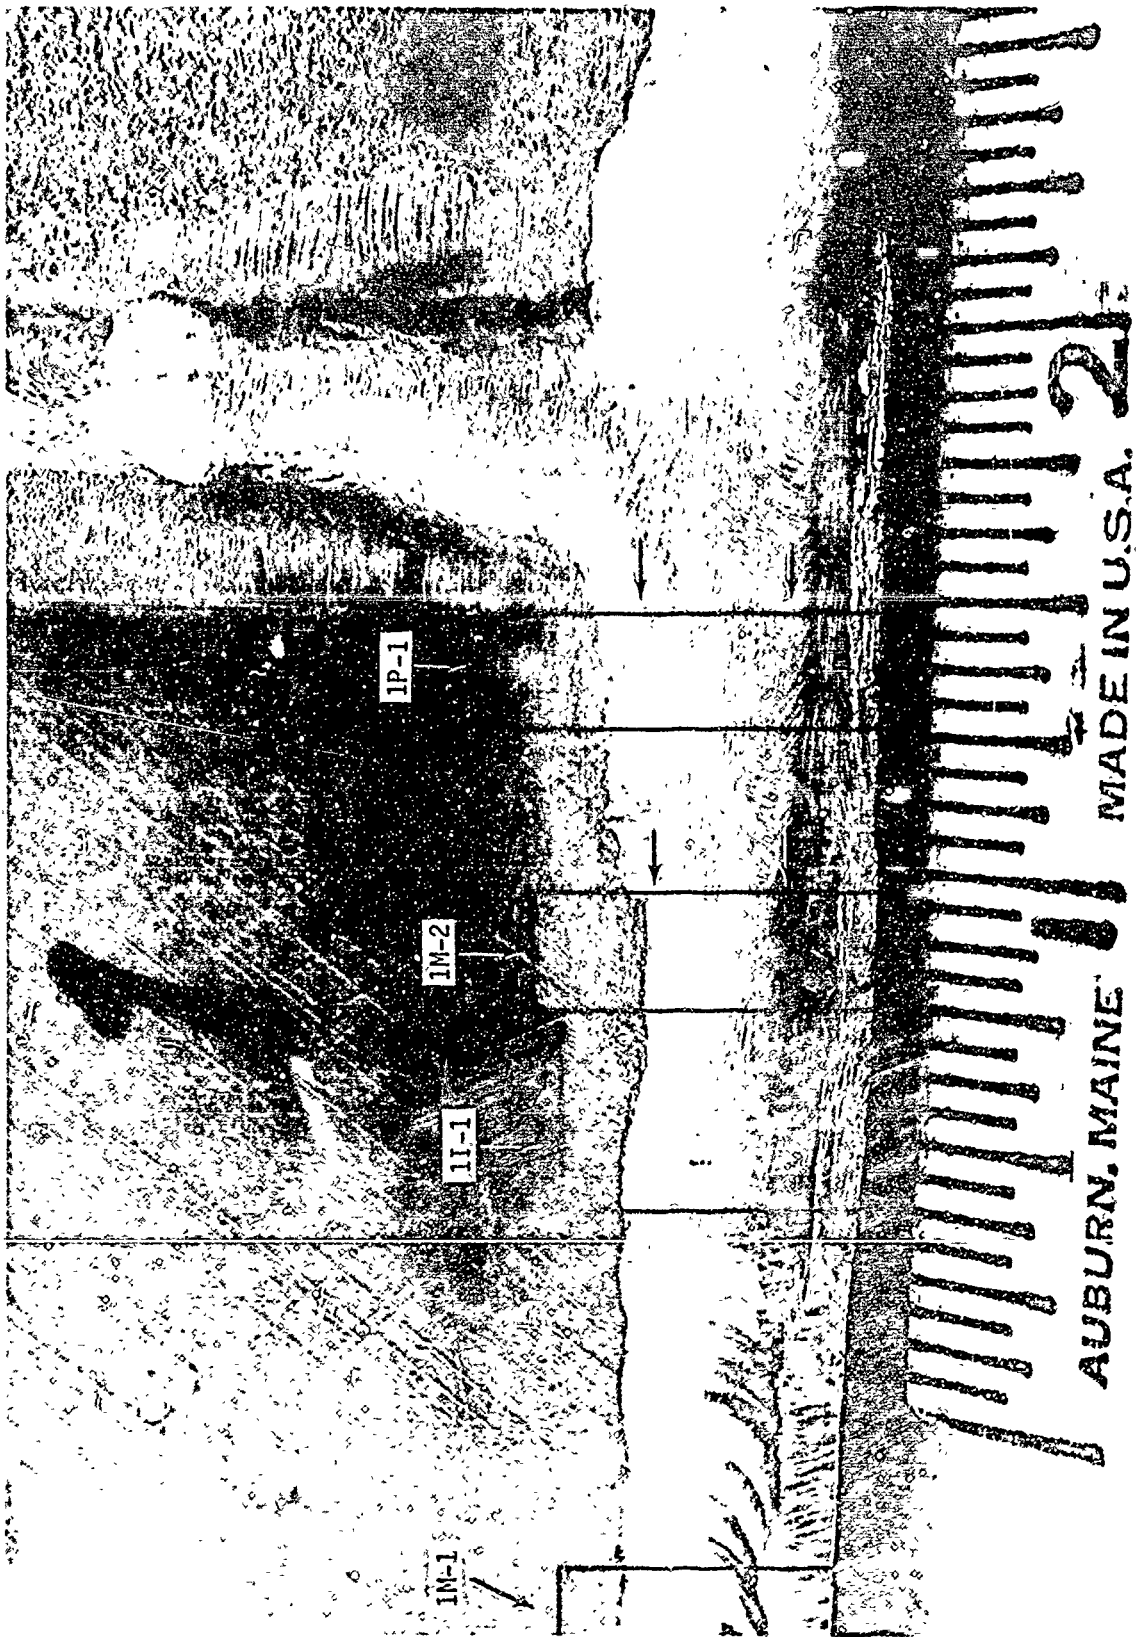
Specimen No. 1 (Cutout A) Showing Cracks Alongside Repair Weld at Junction
